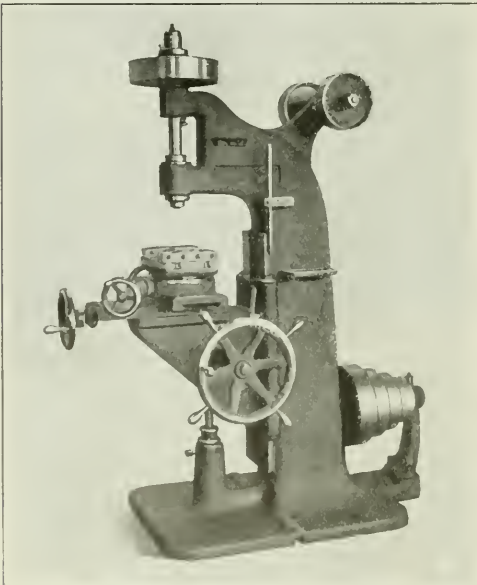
Improved Die-sinking Machine brought out by the Pratt & Whitney Co.
